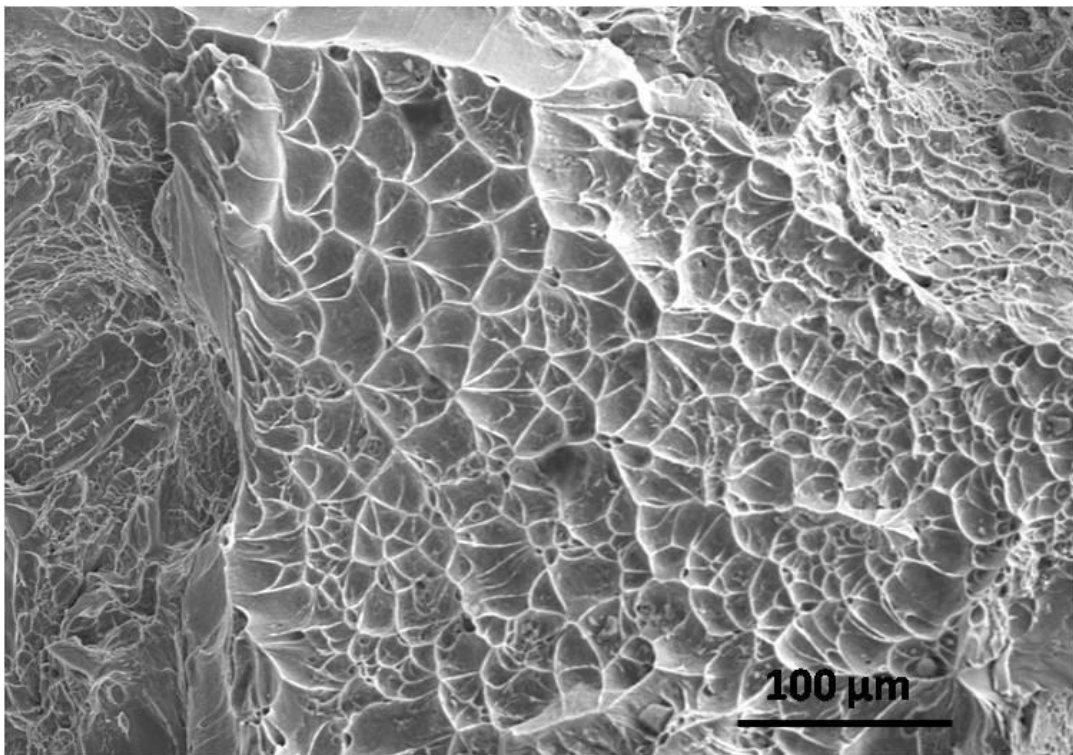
Tensile fracture surface of specimen with triple melt scan passes
